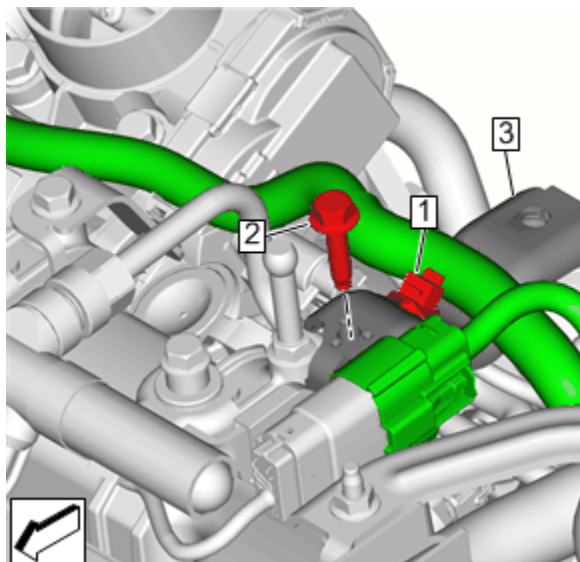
Air Cleaner Resonator Bracket And Bolt
